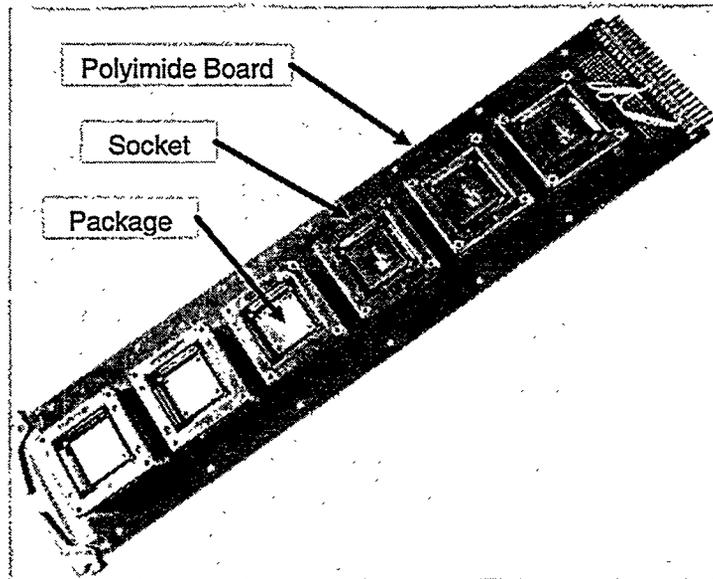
Polyimide HAST board with test sockets and ATC02.5 PQFPs mounted in these sockets.
